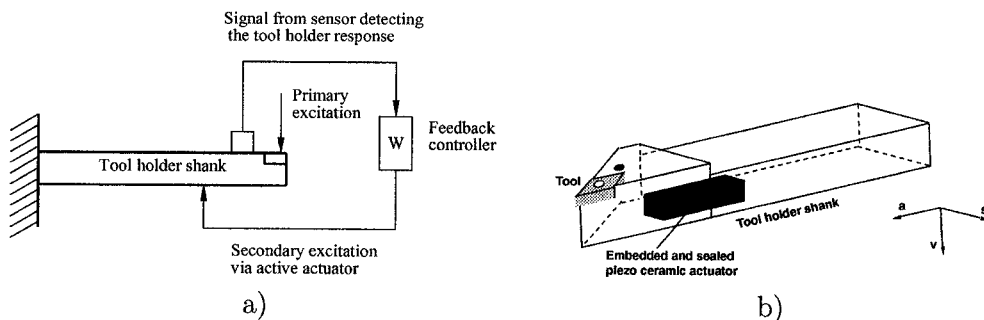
a) A machine-tool feedback control system[2], and b) Tool holder with embedded actuator for the control of tool vibration in the metal cutting process.
